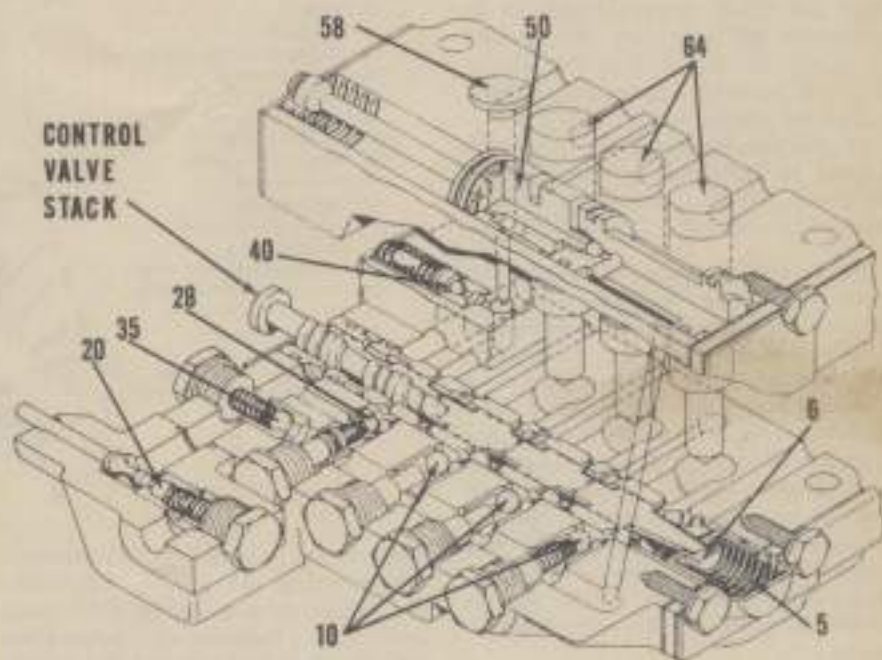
Cut-away view of the plunger type hydraulic pump assembly. Early production pump is shown; refer to differences between Figs. 149 and 150 for production changes. Spring behind hold position valve (20) should be discarded.
